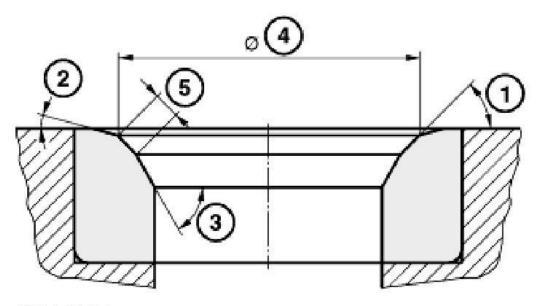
Machining Valve Seat Surface With Special Tool Courtesy of BMW OF NORTH AMERICA, INC.
